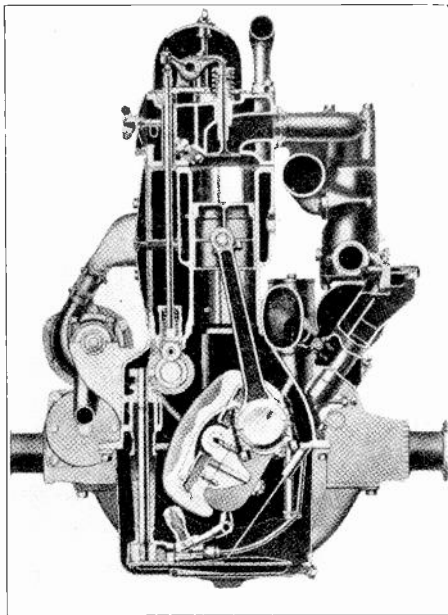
End and sectional view of a Buick engine showing the overhead valve construction, the method of operating valves by means of long push rods, and overhead rocker arms.
